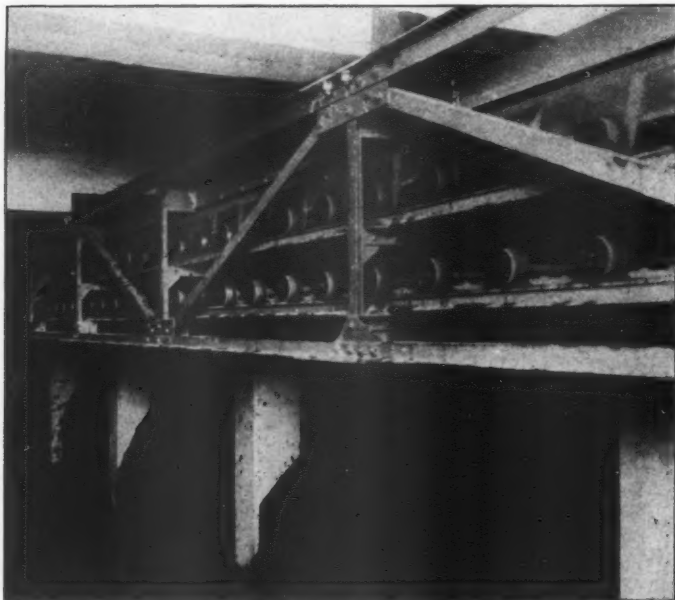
CONVEYOR UNDER FOUNDRY FLOOR FOR REMOVING USED SAND
